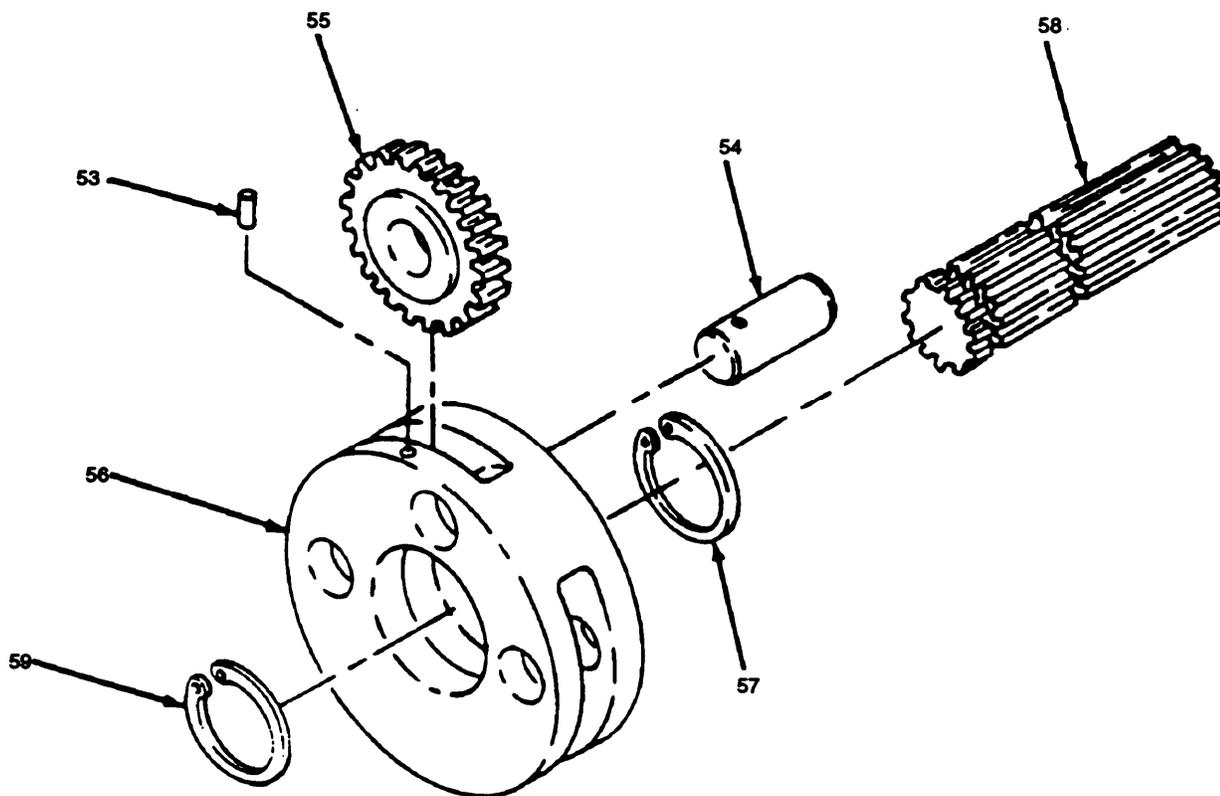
Winch Assembly Model PG-115-043R, Reassembly (Sheet 3 of 7).
